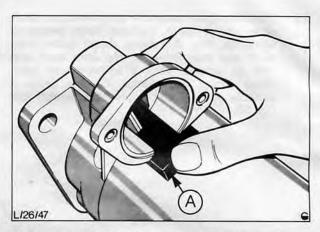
Rubber block location between solenoid mounting bracket and yoke
